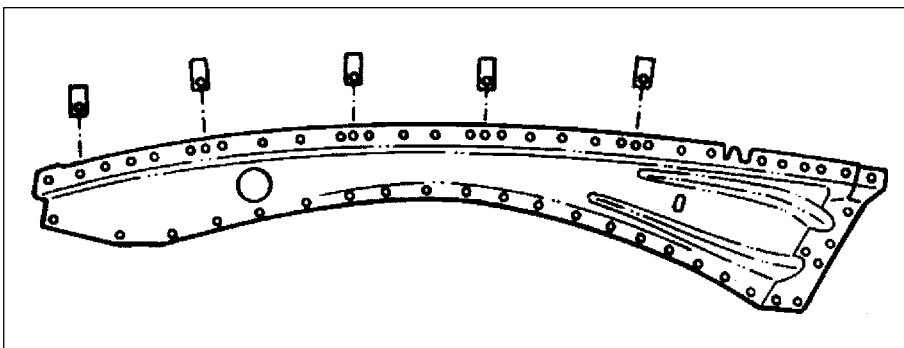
When replacing the upper rail, special J-clips must be installed before welding. These clips hold the fender mounting bolts in place.
